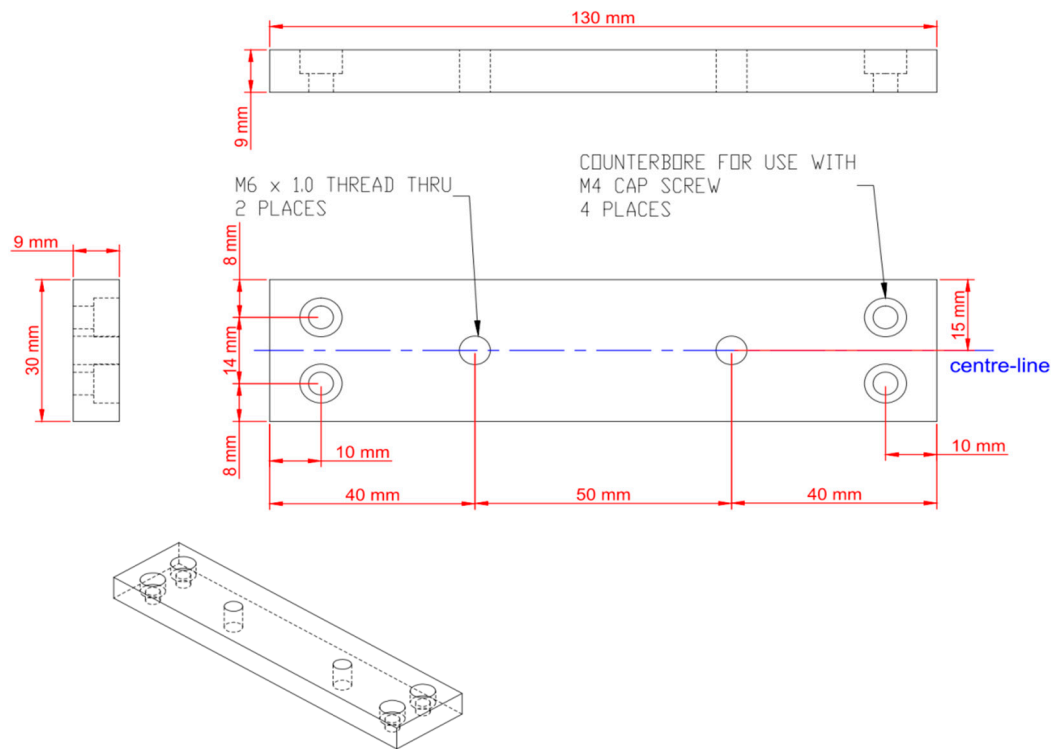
Detailed mechanical drawing of Part 7 from Figure S1.
